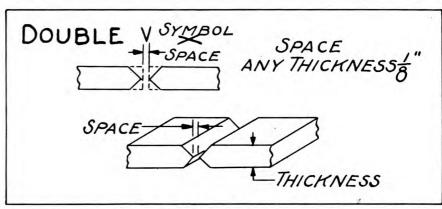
DOUBLE-V DESIGN OF ELECTRIC WELD
